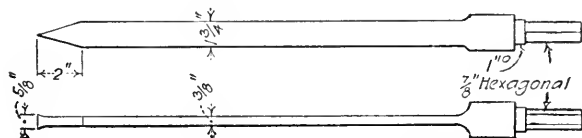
COPPER-CUTTING TOOL FOR PNEUMATIC HAMMER.
